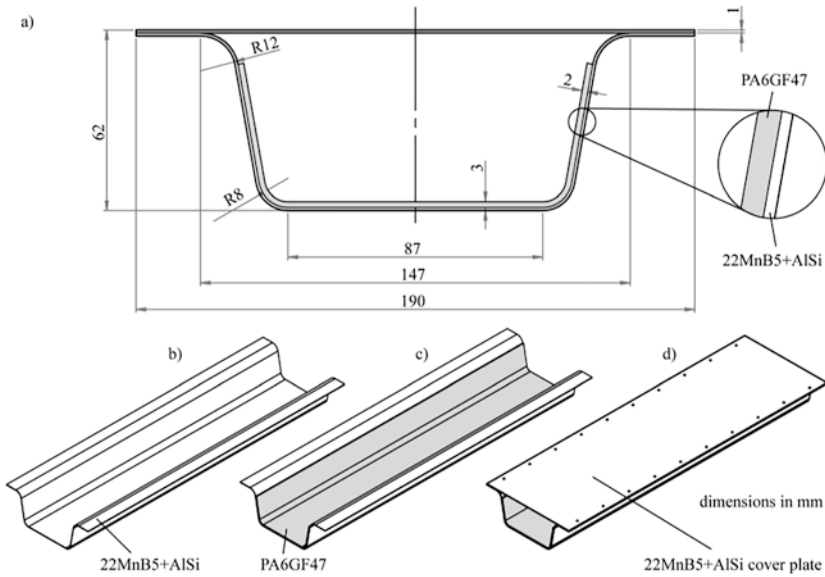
Dimensions of the demonstrator geometry. a) Cross-section of hybrid u-shaped profile, b) hot stamped u-shaped profile, c) FRTP applied u-shaped profile and d) u-shaped profile closed with cover plate.
